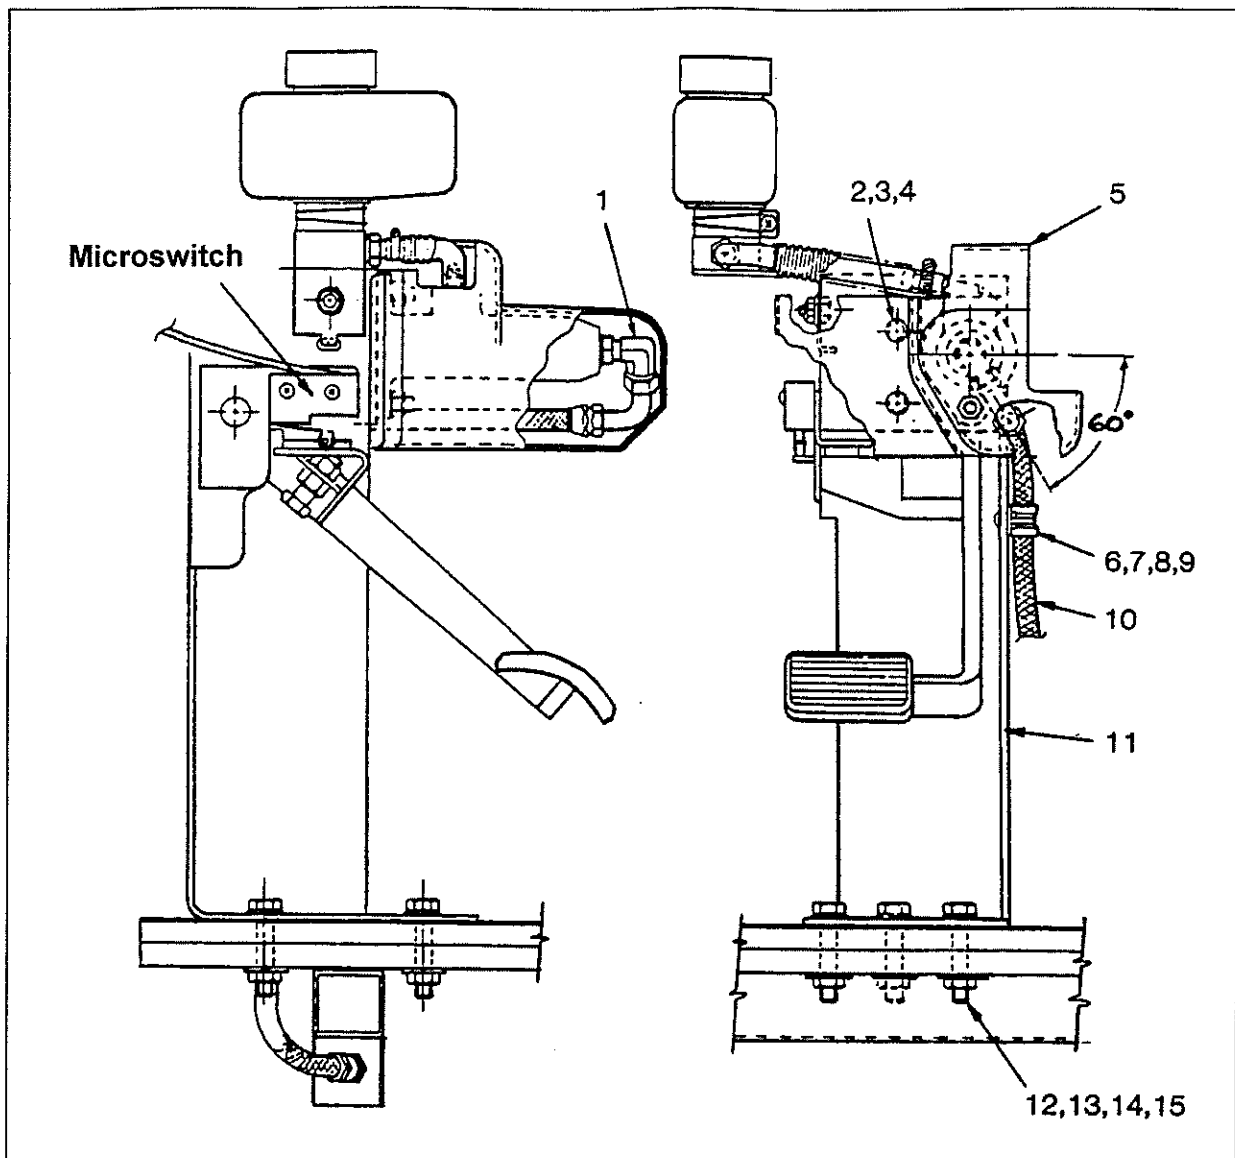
CLUTCH PEDAL ASSEMBLY INSTALLATION.
